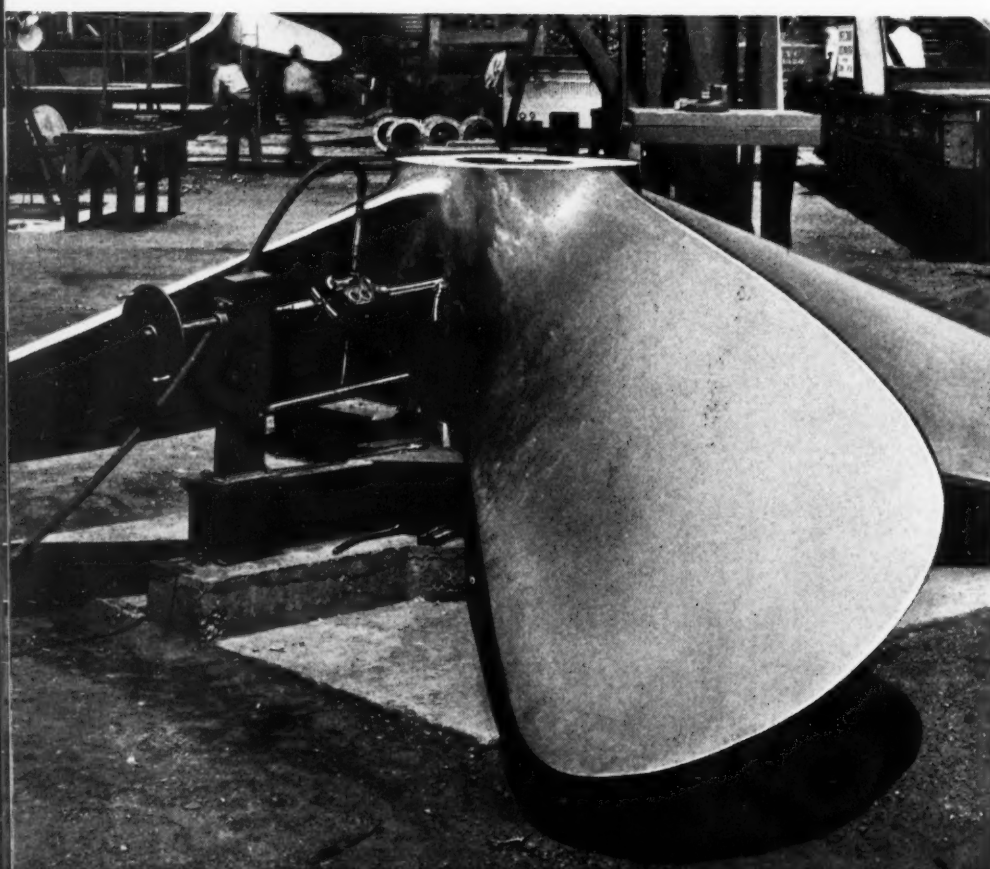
Special Stand and Feeding Arrangement Employed in Drilling the Four Tallow Holes through the Hub of the Propeller
